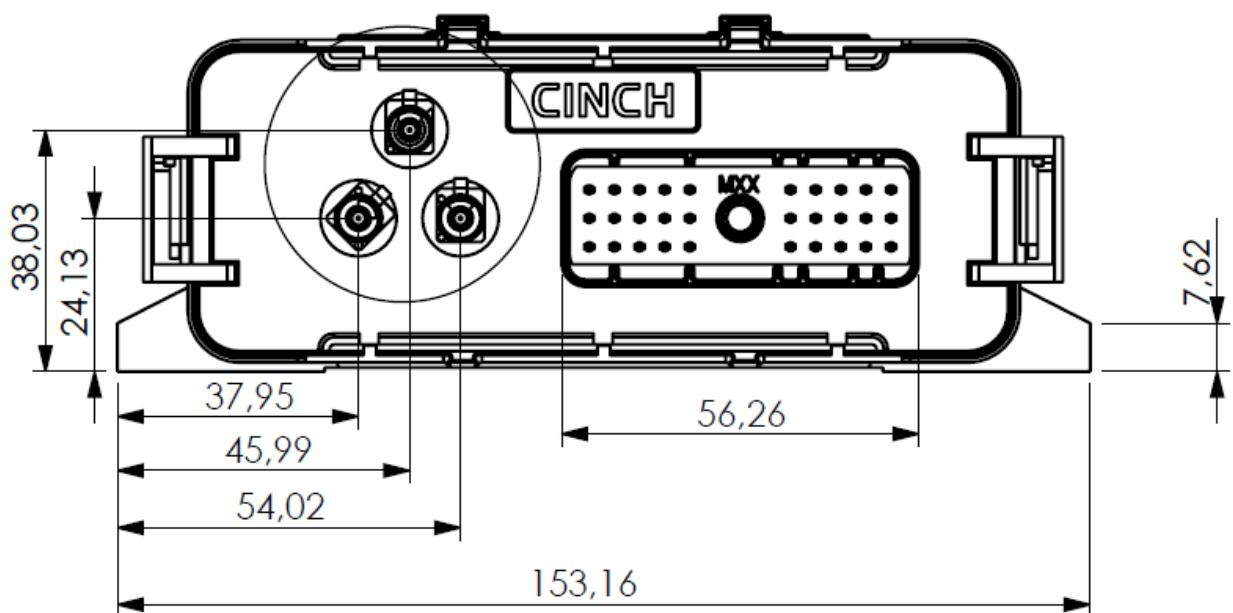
Verona Gen 4 Telemetry - Front View with Dimensions
